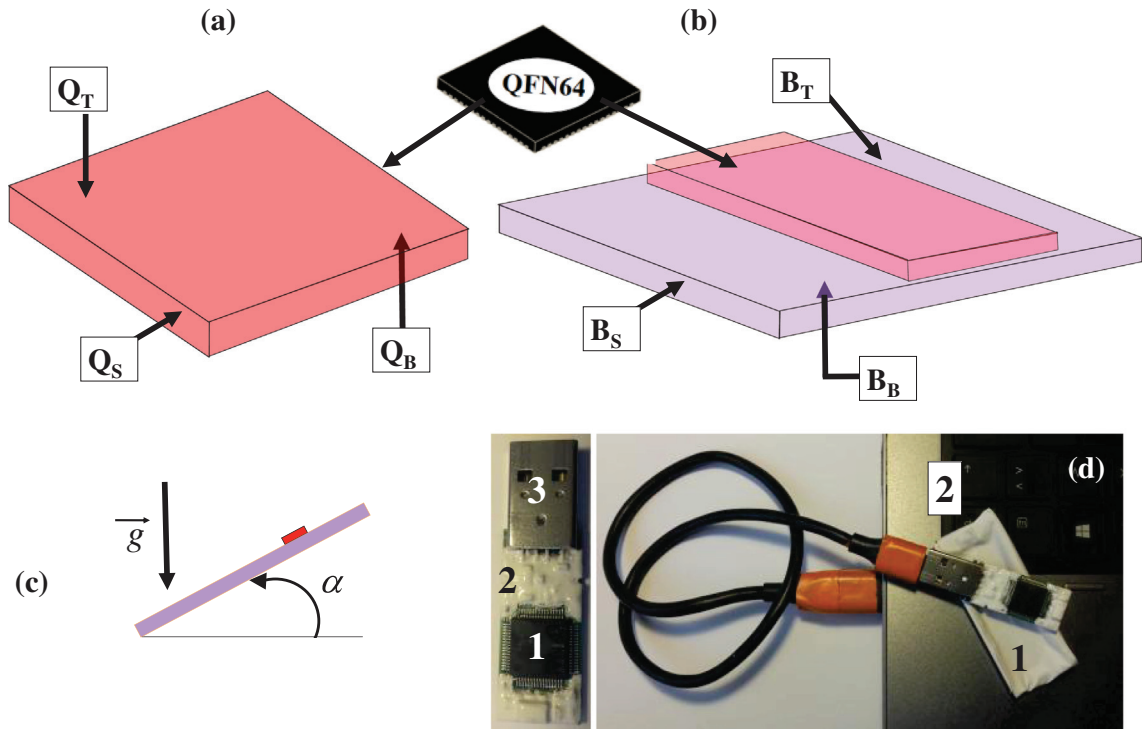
(a) The considered QFN64 with its (Q_T), (Q_S) and (Q_B) areas; (b) The PCB with its (B_T), (B_S) and (B_B) areas; (c) the PCB inclination angle α ; (d) The considered assembly.
